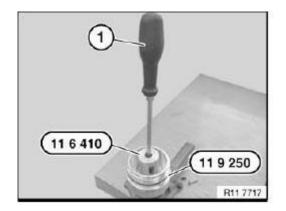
Inserting Central Screw Using Screwdriver Courtesy of BMW OF NORTH AMERICA, INC.
